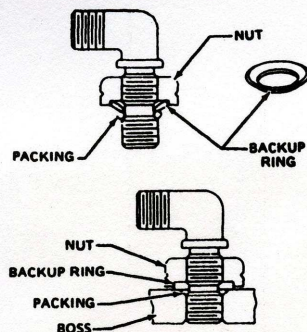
Hose and Tube Fitting— Assembly Procedures (Sheet 1 of 2)
